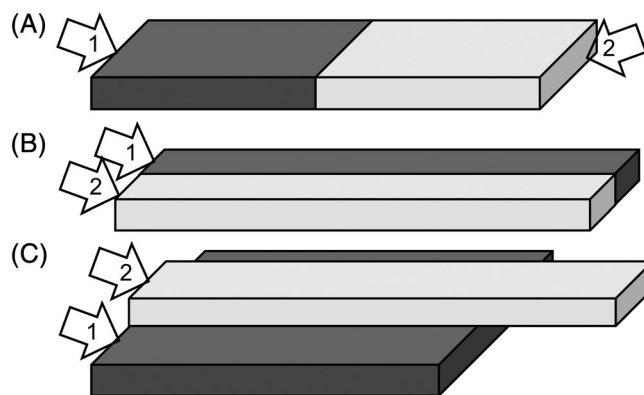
Schematics of specimen geometries. In these drawings, the first shot (hard) is dark gray and the second shot (soft) is light gray. The arrows indicate typical gate locations. A, Butt joint; B, Side surface joint; C, Top surface joint. Type C was used in this study, but with equal widths of first and second shot
